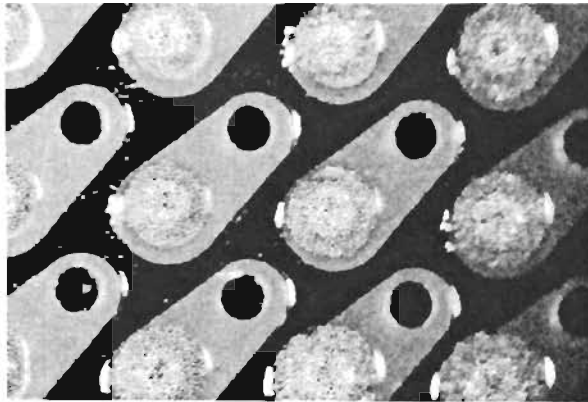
Solder paste deposits on teardrop pads (EPS)
